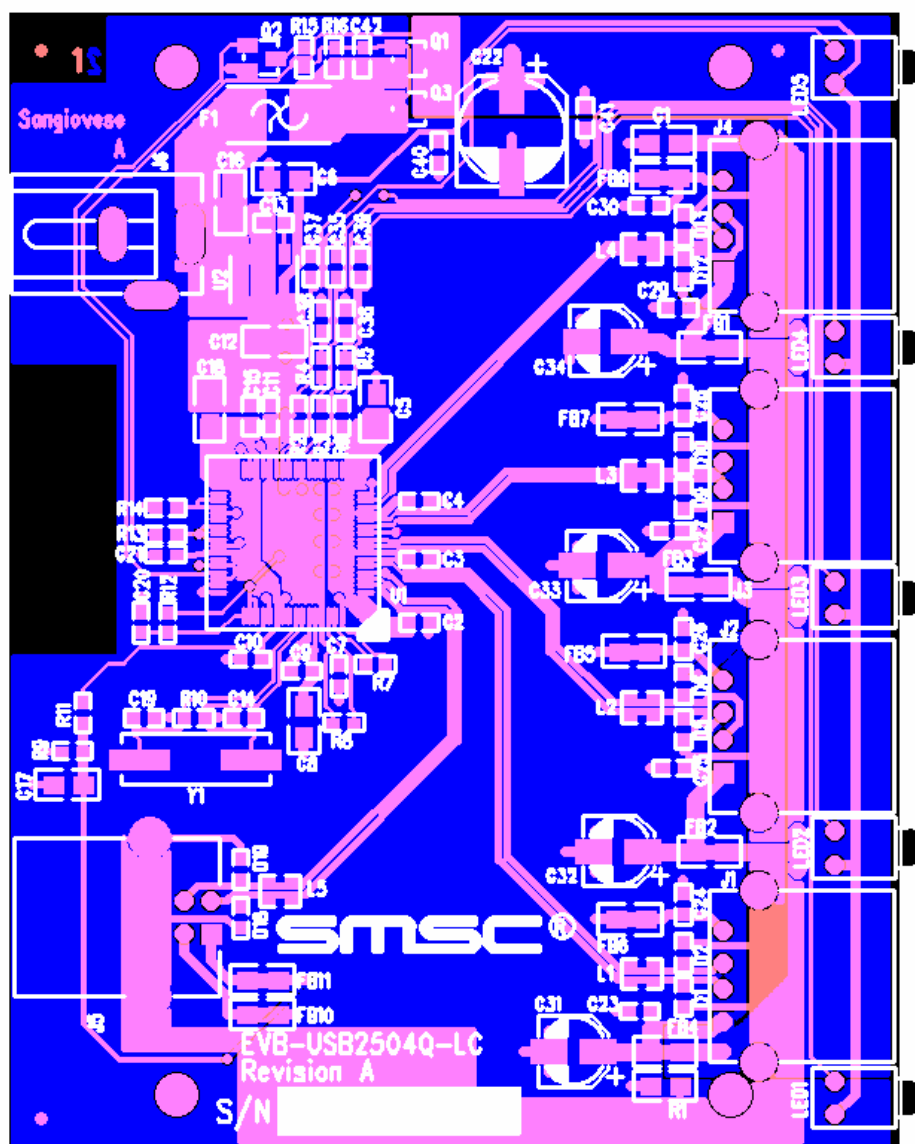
Overall view with three layers shown: Top silk-screen (white), top copper layer (red) and bottom copper layer (blue).
